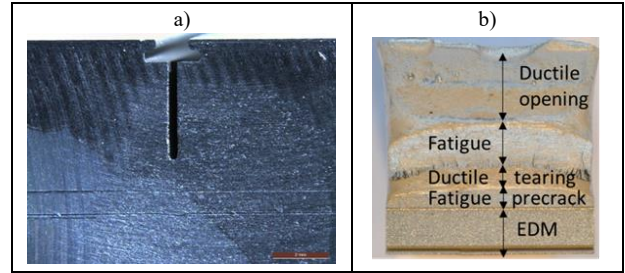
Fracture mechanical testing of SENB specimens: pre-crack in HAZ (a) and fracture surface (b).
